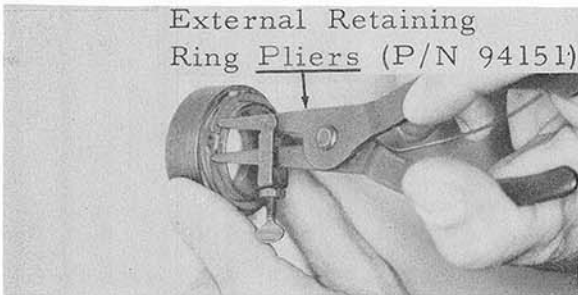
DISASSEMBLY OF UPPER RECEIVER(Continued)
